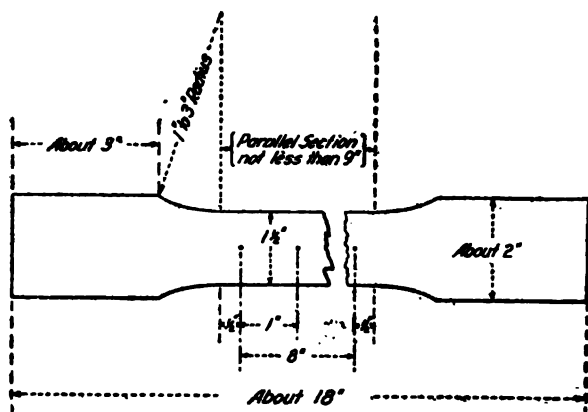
Form and dimensions of test specimen for tension and bending tests of plates, shapes, and bars.
